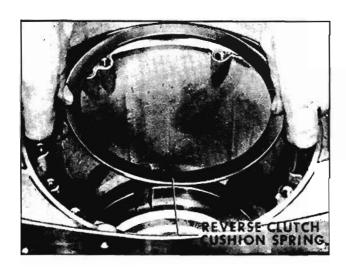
Removing Reverse Clutch Cushion Spring
